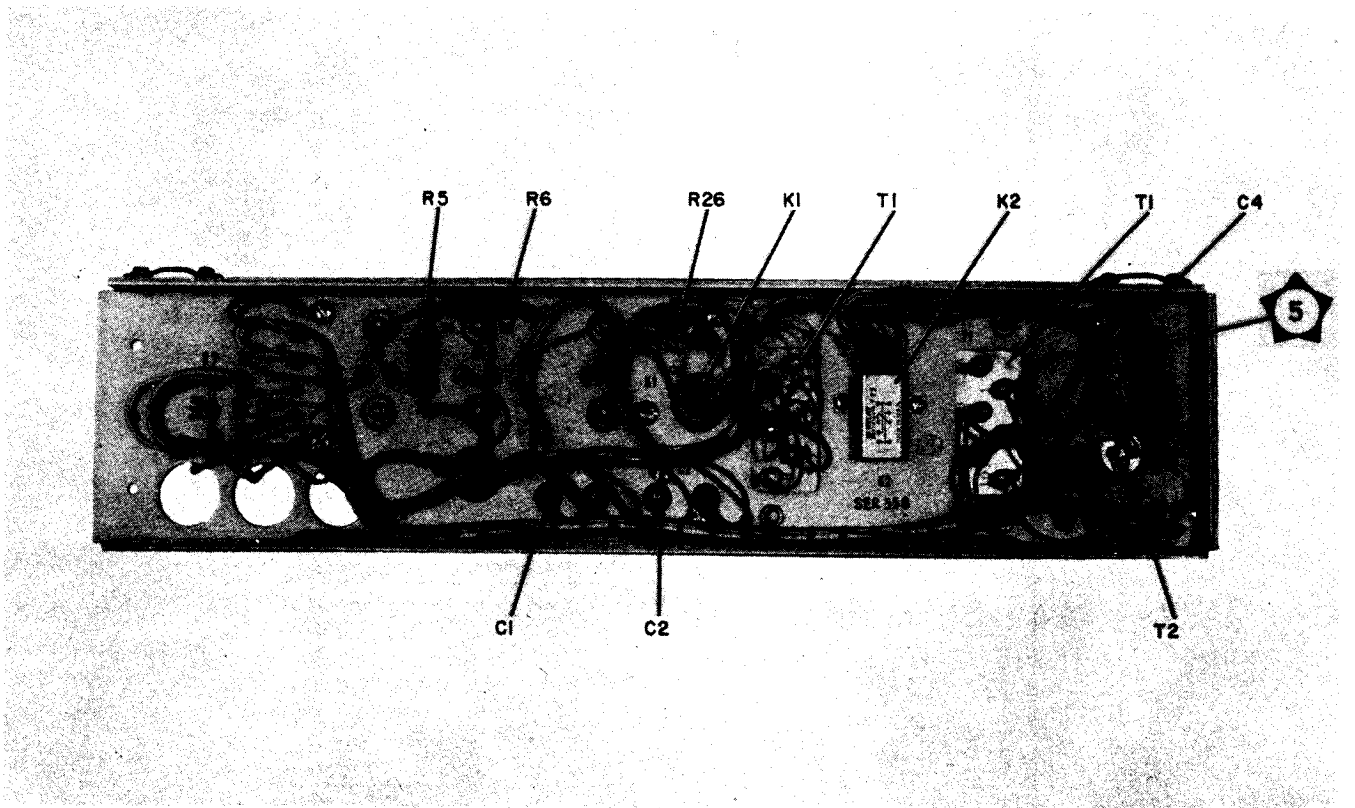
Power Supply, Bottom View, Component and Test Point Locations
